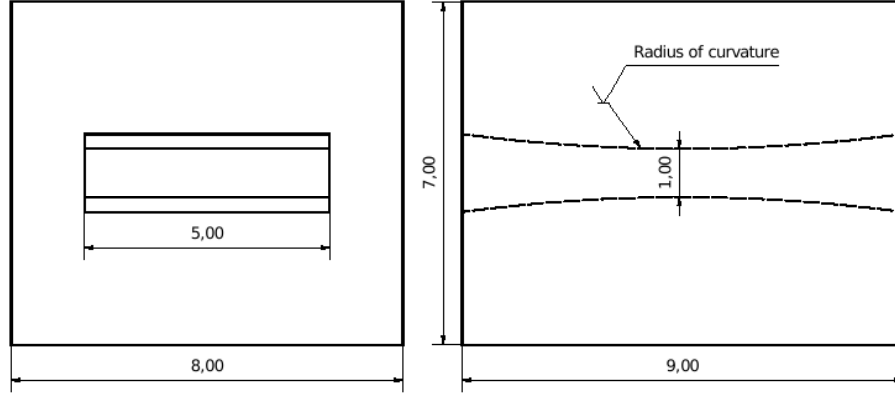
Schematic drawings displaying the nominal dimensions, in mm, of the glued dies. The nominal die dimensions used in the extrusion experiments are all the same, except for the radius of curvature R_c . However, their real dimensions vary slightly. These discrepancies are presented in Table 4.2.
